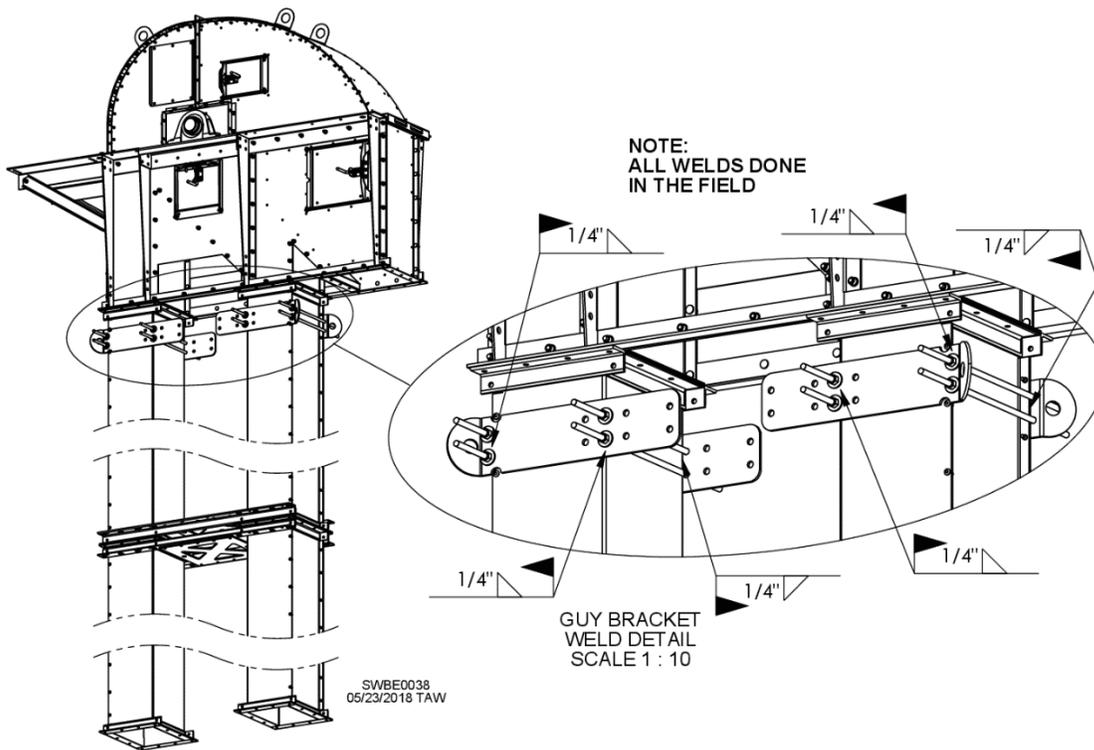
Field-welding top guy wire brackets to trunking
